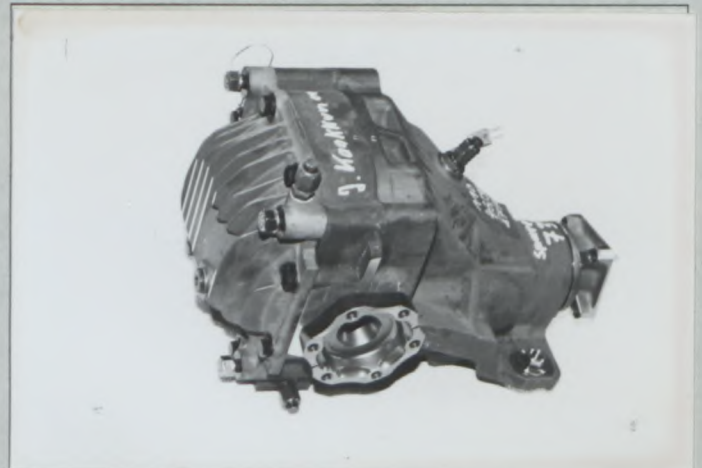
(REINFORCED RADIUS ROD ANCHORAGE POINTS)
